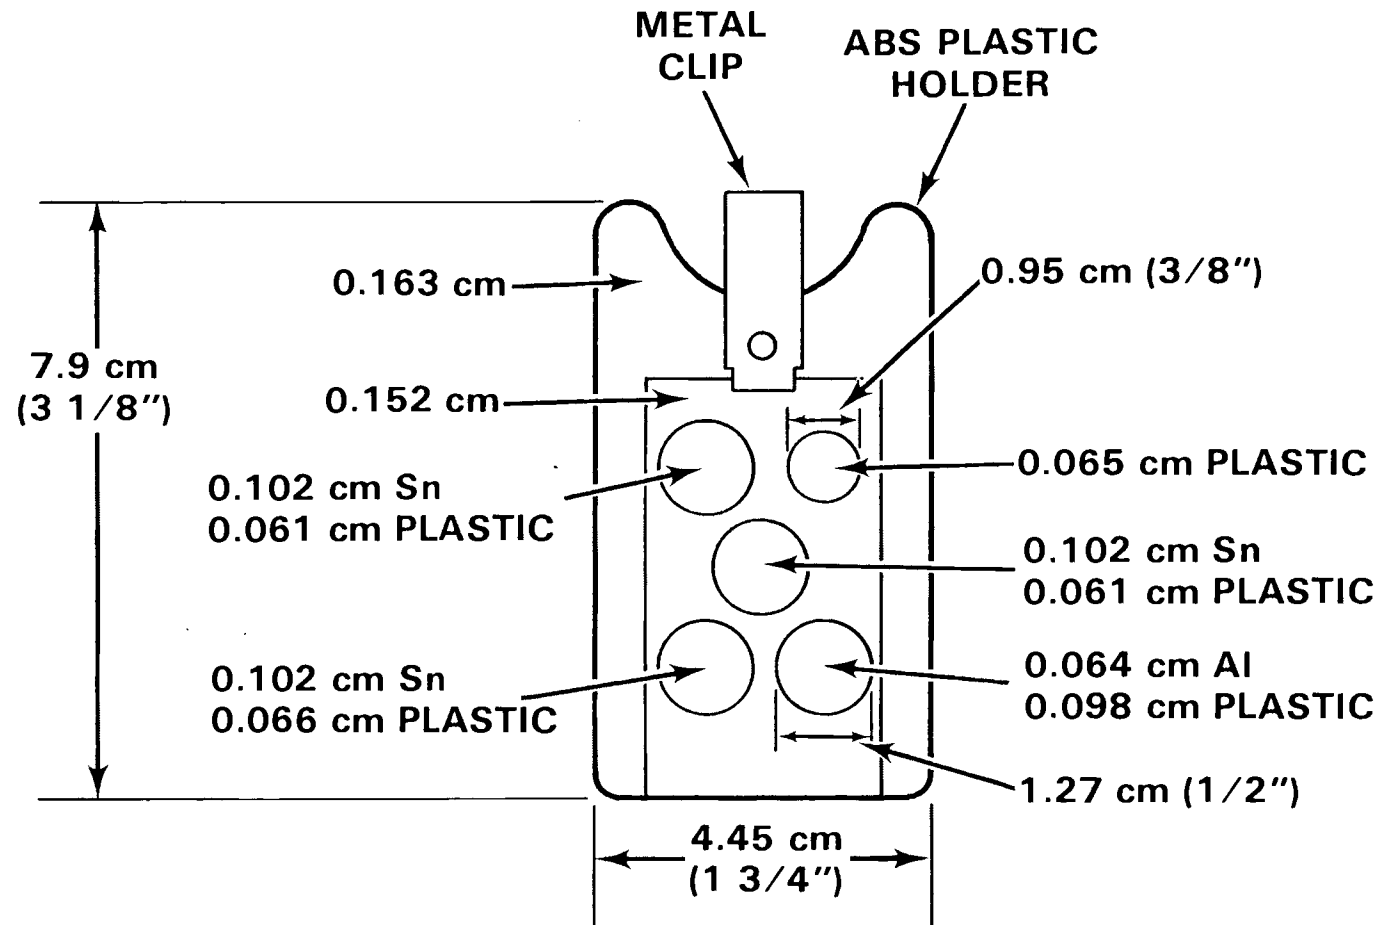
Back View of Dosimeter Holder (actual size)
